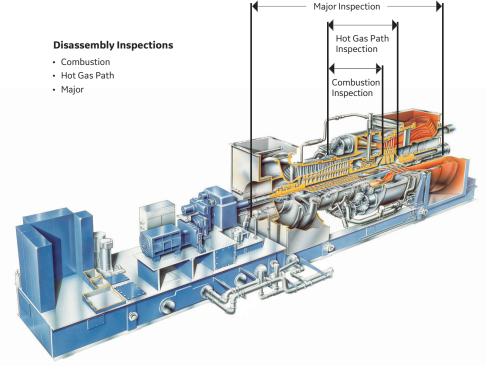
7E.03 heavy-duty gas turbine – disassembly inspections
